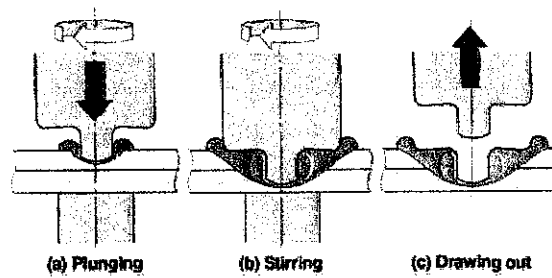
Three phases of Friction Stir Spot Welding Process [1]
